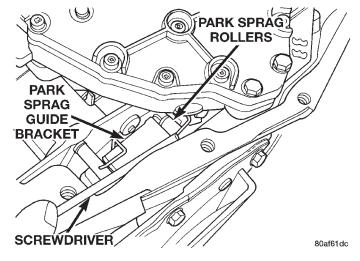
Push Park Rod Rollers from Guide Bracket INSTALLATION
